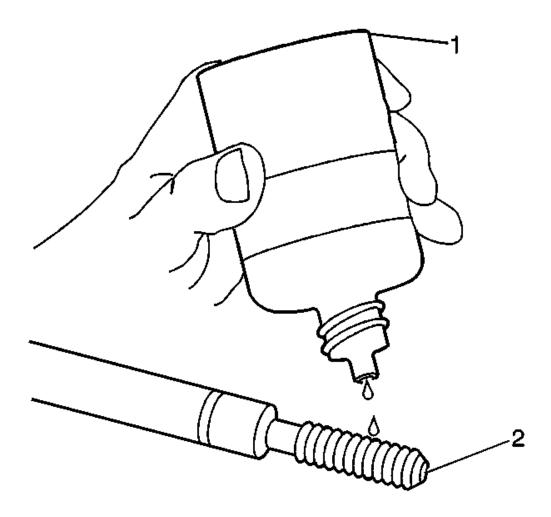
Lubricating Installer Tool Using Driver Oil Courtesy of GENERAL MOTORS COMPANY
